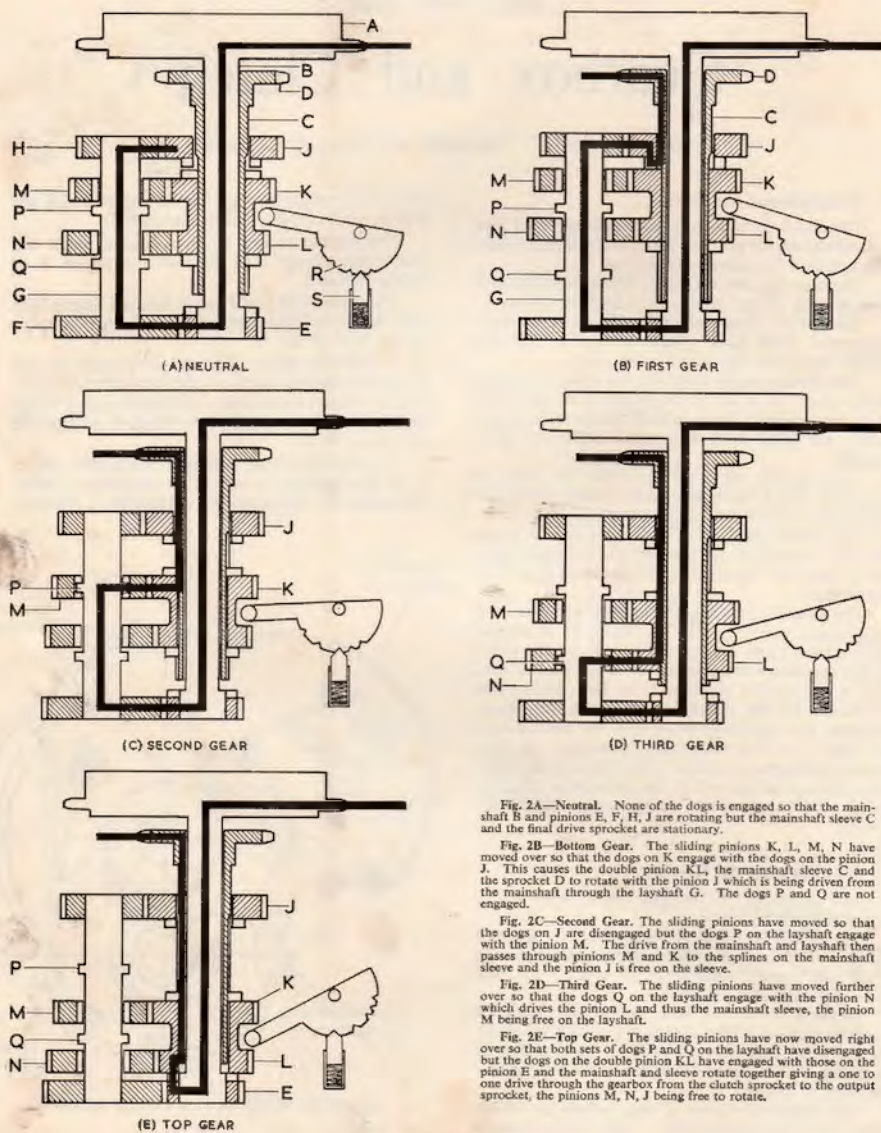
A—Neutral. None of the dogs is engaged so that the mainshaft B and pinions E, F, H, J are rotating but the mainshaft sleeve C and the final drive sprocket are stationary.
